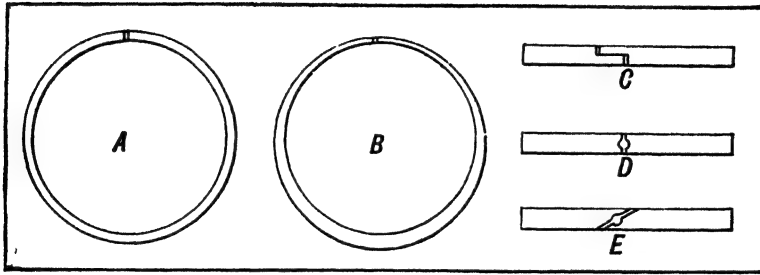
Common Types of Piston Rings and Ring Joints. A—Concentric Ring. B—Eccentrically Machined Form. C—Lap Joint Ring. D—Butt Joint, Now Seldom Used. E—Diagonal Cut Member is a Popular Form.
